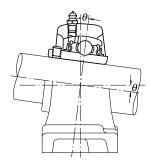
Permissible Misalignment of Ball Bearing Units
